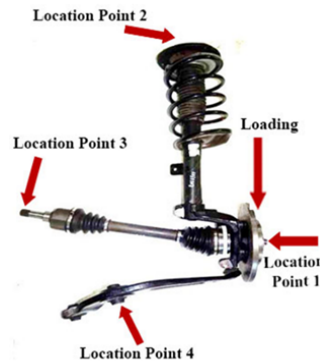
Fixture and load location on the assembly suspension model in FEM.
